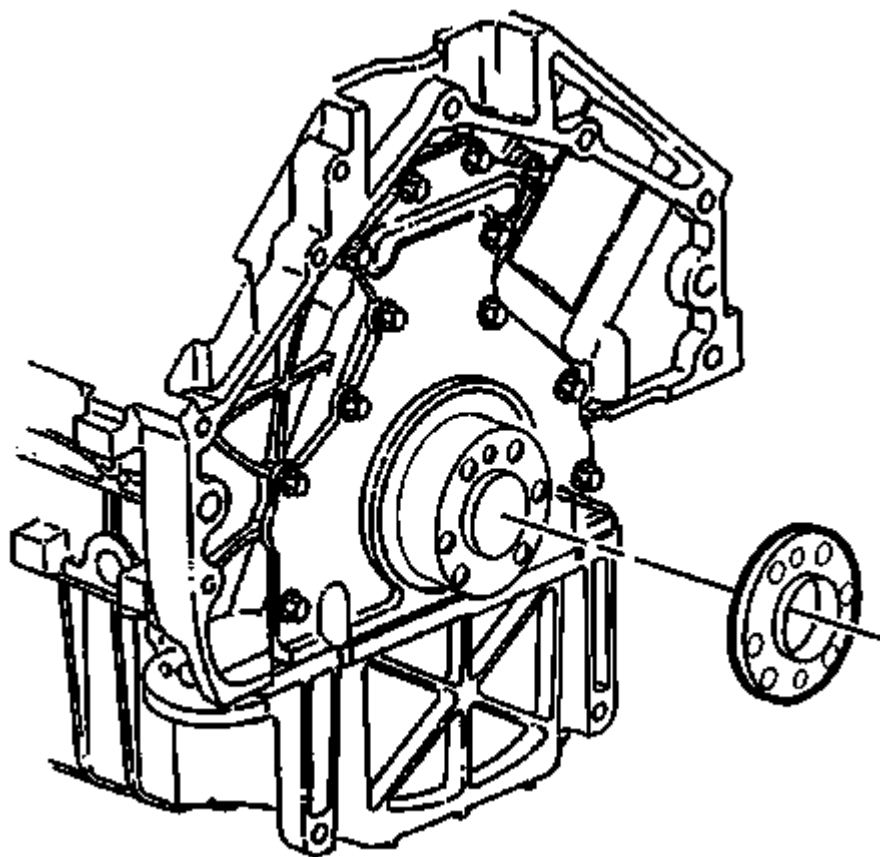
View Of Spacer & Crankshaft Rear
